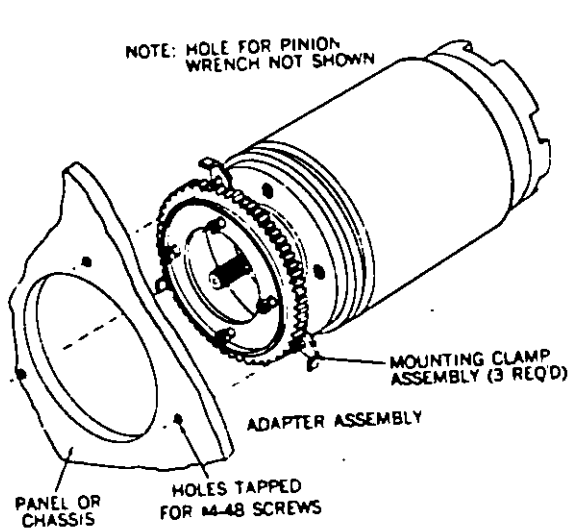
Mounting a synchro using an adapter assembly (from the terminal board end).
